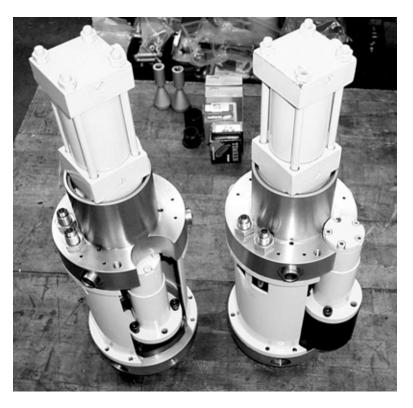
The cutting machine for smaller casings is on the left, and the machine for larger casings (with the external gearbox) is on the right. (Hoses and lift assemblies have been removed.)
